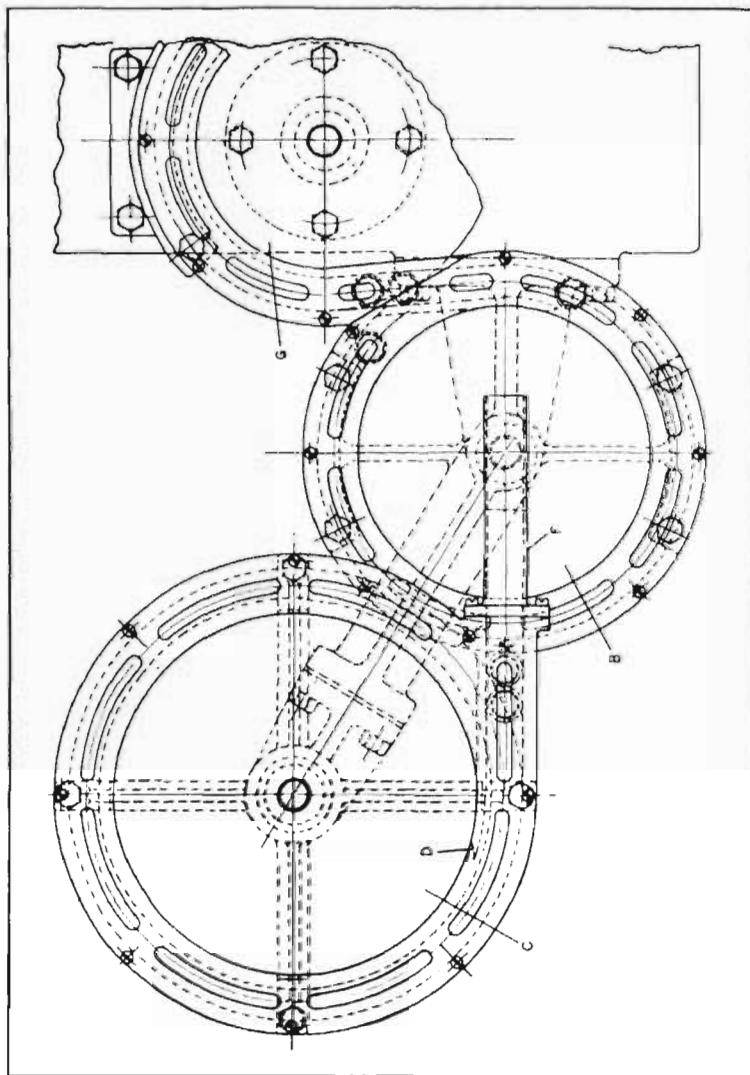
Plan view of bottle cap feeding equipment shown in Fig. 15.
